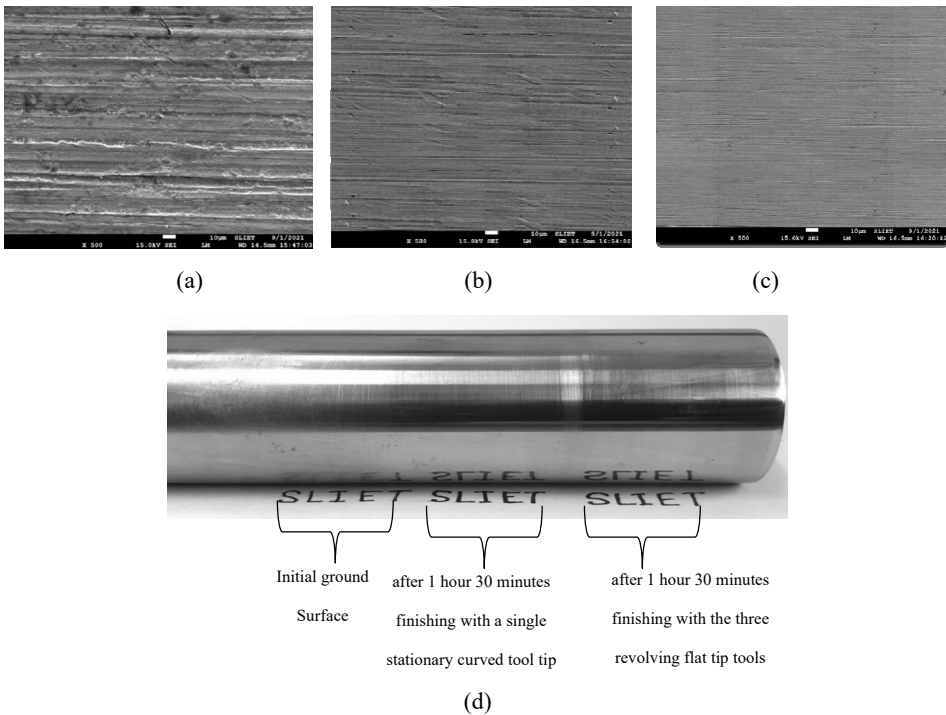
Surface roughness profile of (a) primary surface of the cylindrical workpiece after the grinding operation (b) after 1 hour 30 minutes finishing with a single stationary curved tip tool process (c) after 1 hour 30 minutes finishing with the three revolving flat tip tools process (see online version for colours)
